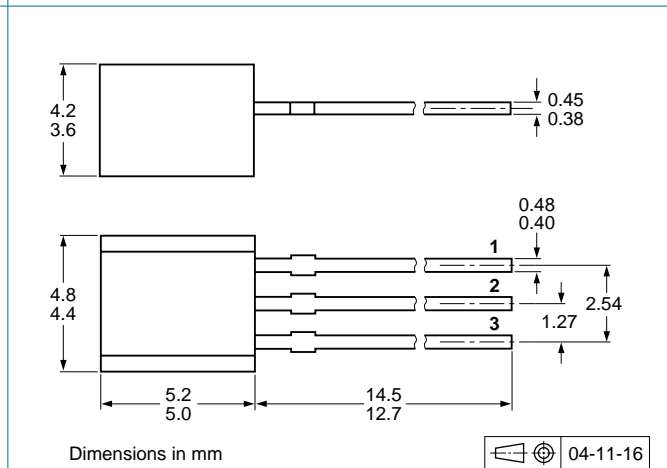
Package outline SOT54 (SC-43A/TO-92)
